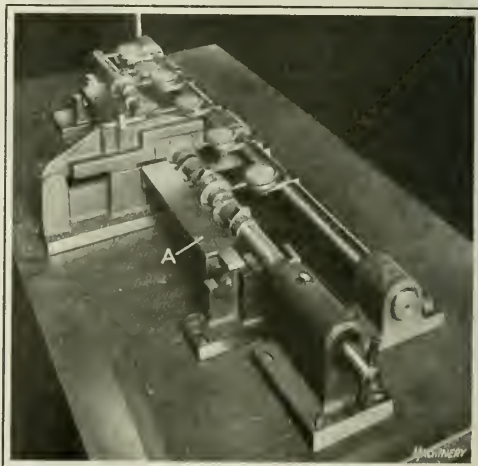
Testing Spacing of Cams and Bearings, and Concentricity of Bearings
